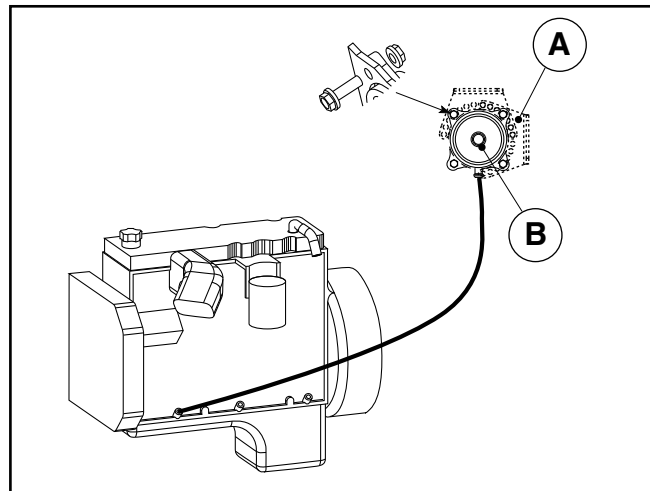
Installing the Mounting Bracket Installing the Insert Fitting
